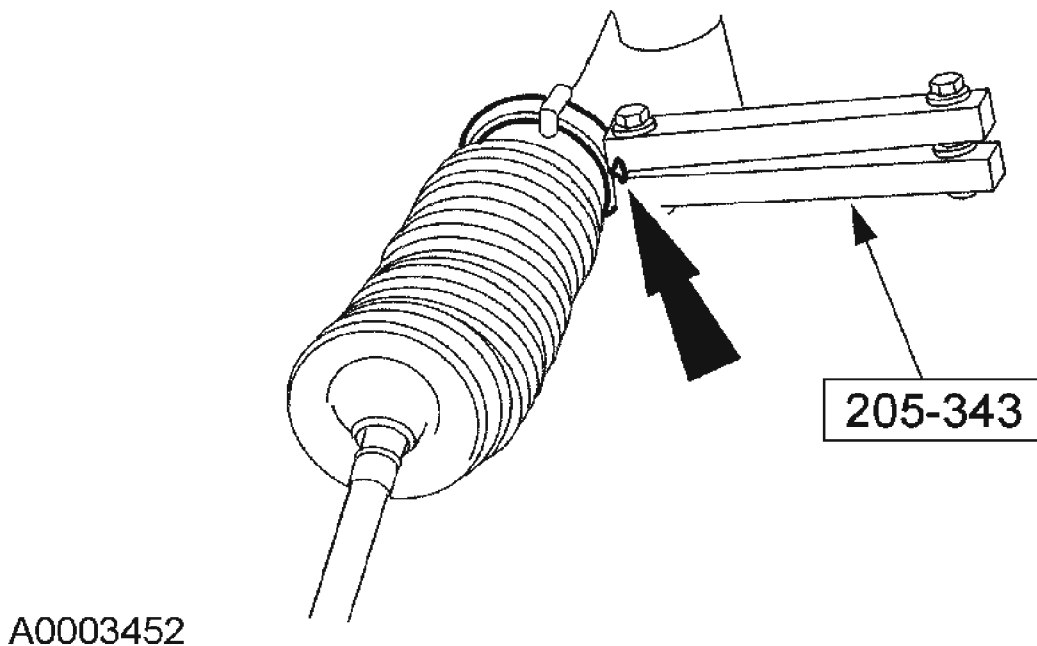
Using Special Tool To Tighten Steering Gear Inner Boot Clamp
